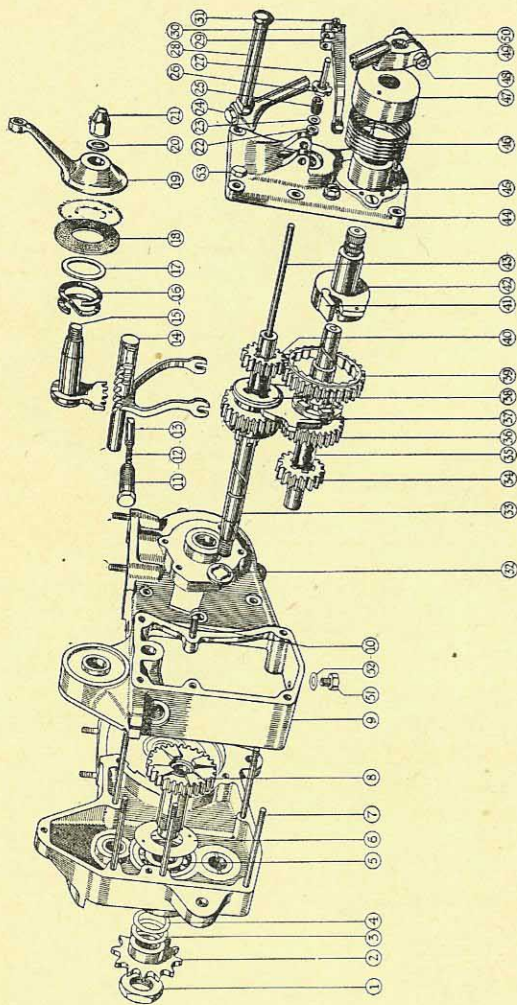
EXPLODED VIEW OF MARK 9D GEARBOX.
